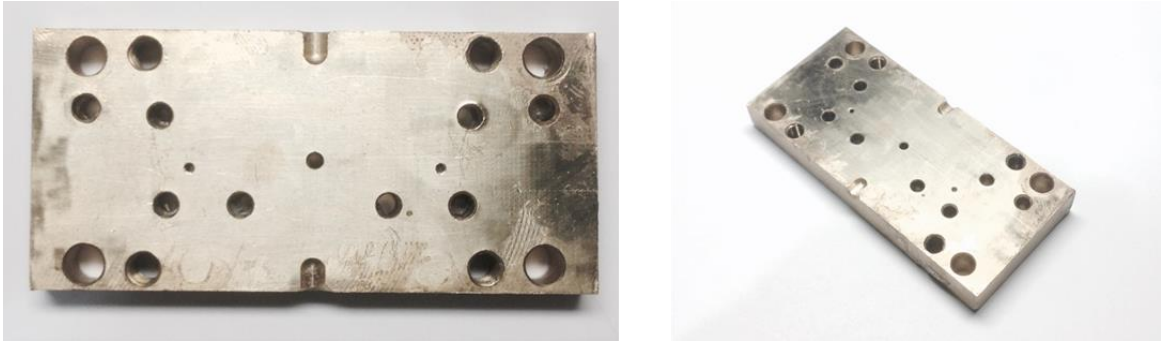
The backplate was flat piece that was polished to a mirror finish to fully enclose the mold and provide optimum surface finish for the part.
